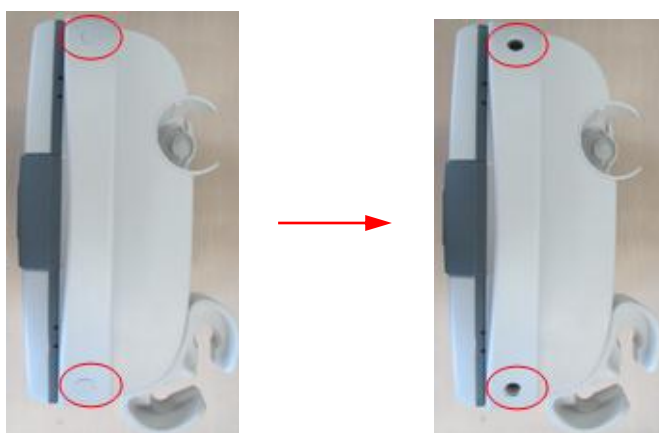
Disassembly of Rear Cover Assembly of Main Unit (1)
